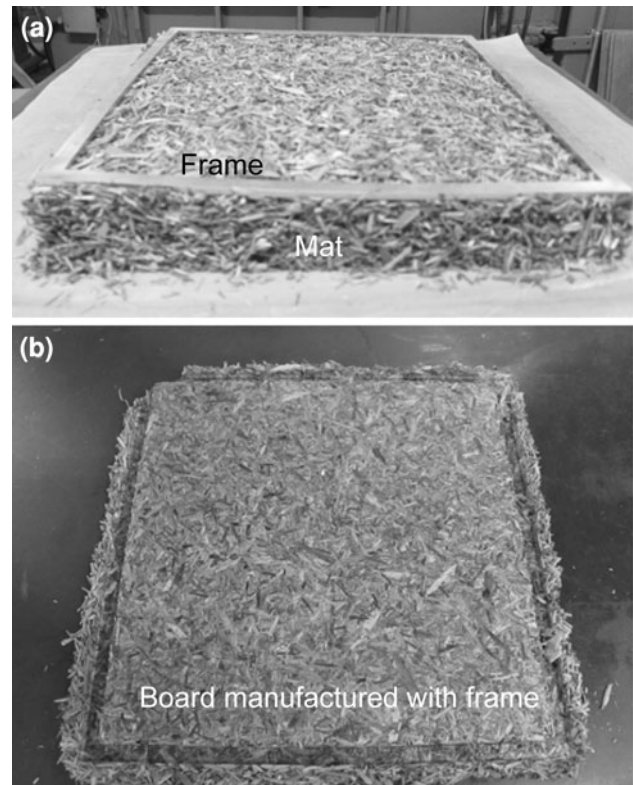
Manufacture of a particleboard by placing a frame (a) and the manufactured board (b)
